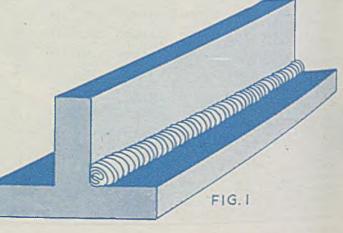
Horizontal fillet weld on 3/8-in, tee section
